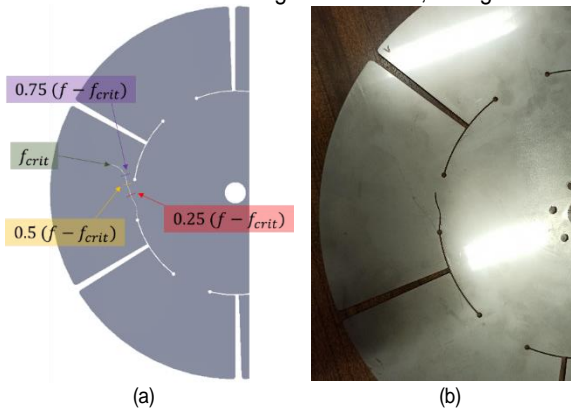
(a) Numerically simulated crack propagation and length of the intermediate cracks that have been sequentially machined in the real disk; (b) picture of the first $0.25(f - f_{crit})$ crack machined in the disk, presenting a corresponding to 25% of frequency reduction its critical length.
